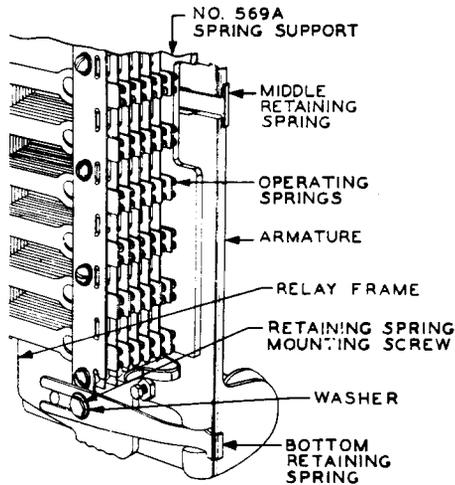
Position of Spring Support When Removing and Mounting Armature
